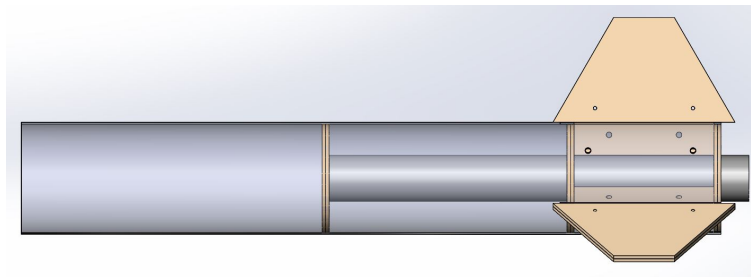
CAD Model of the Fin Can using a Fixed Fin Design
